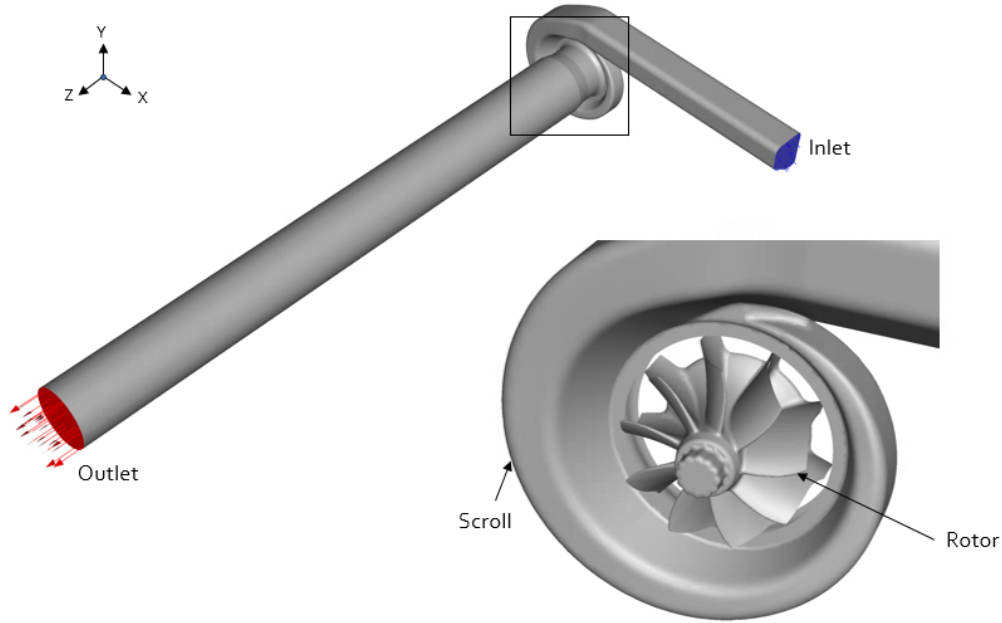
The turbine geometry with a close-up of the rotor wheel.
